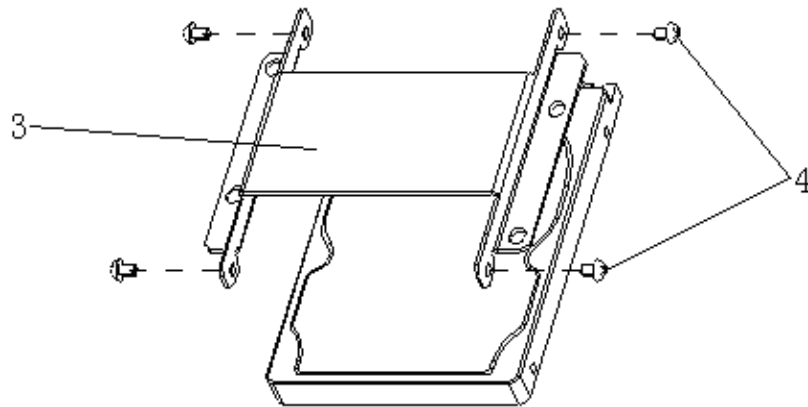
Sketch Map of Harddisk Disassembly (2)
